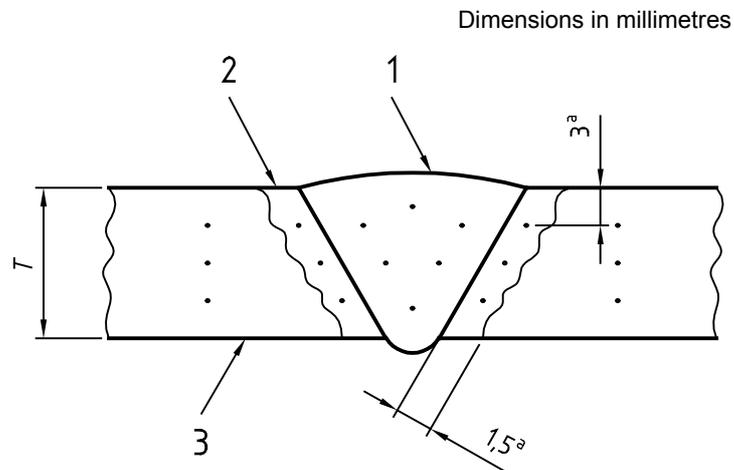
Charpy V-notch weld metal (WM) specimen location
